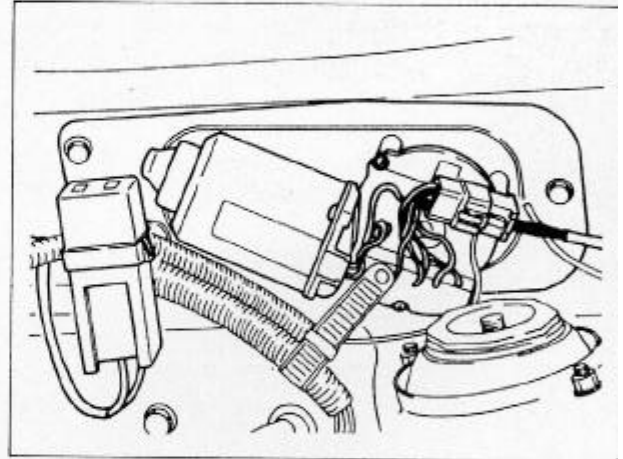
14 LOCATION OF WIPER MOTOR INSTALLATION
